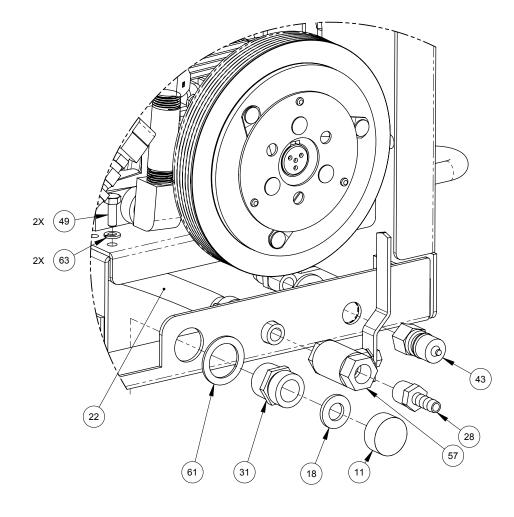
Assembly, Frame - CDS xDrive 601-001-705 Rev. H
